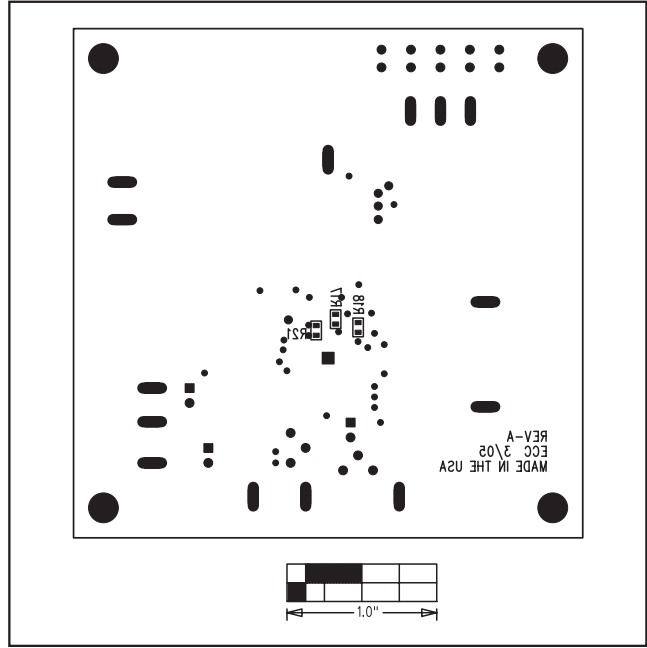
MAX8725 EV Kit Component Placement Guide—Solder Side
